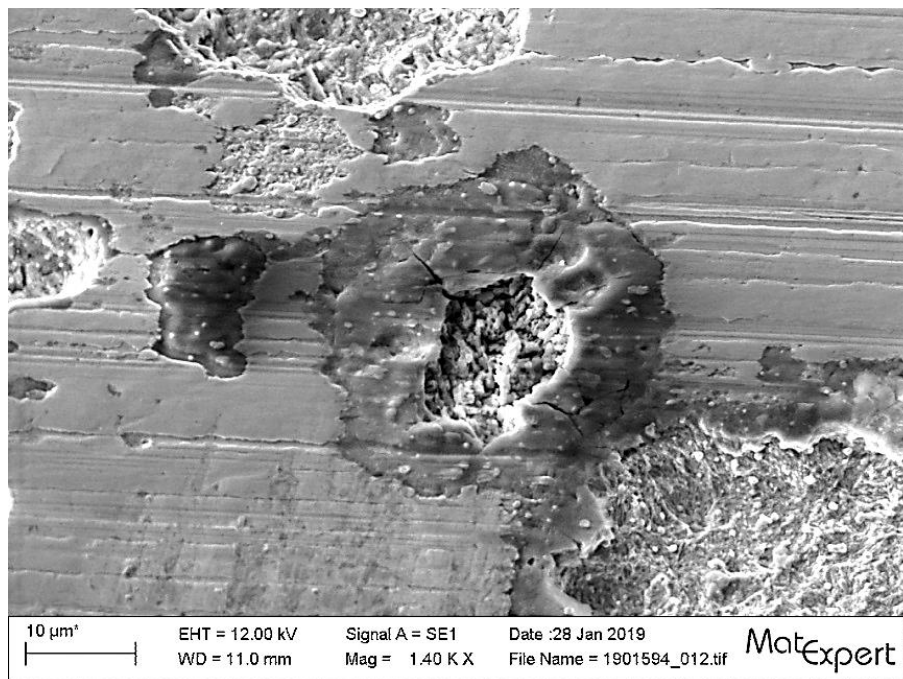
Ball bearing from the right engine, inner-race bearing track – material chipping and corrosive damage.
